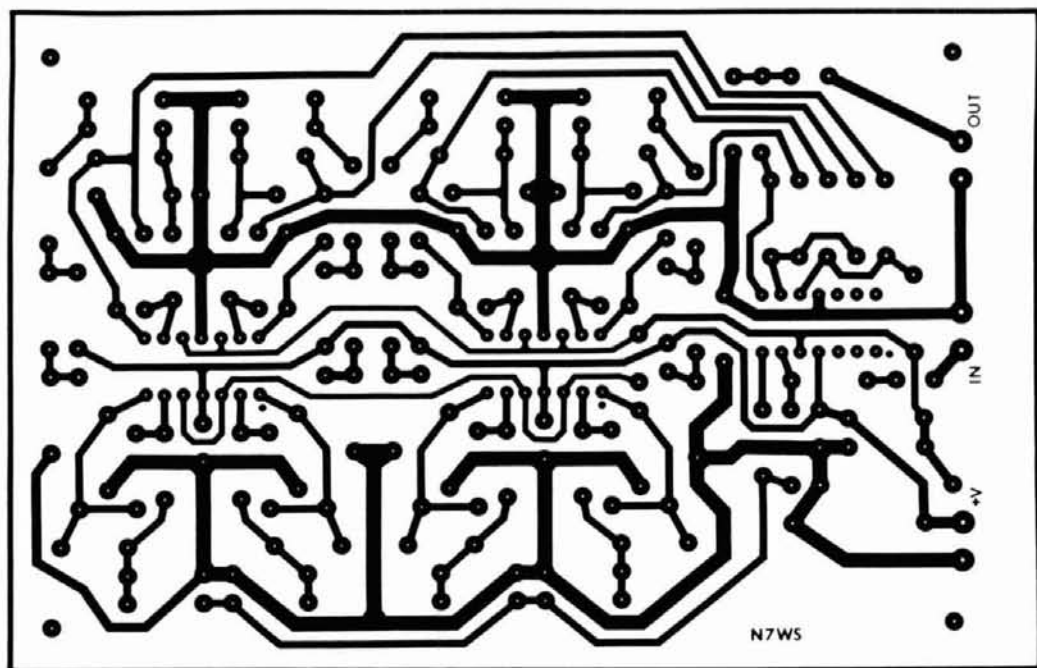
Full-size printed-circuit layout for the audio clipper board.
